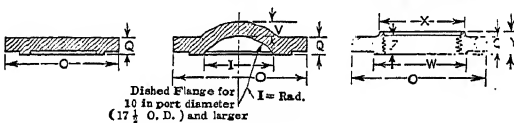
Cast-iron Companion and Blind Flanges, 250-lb.
